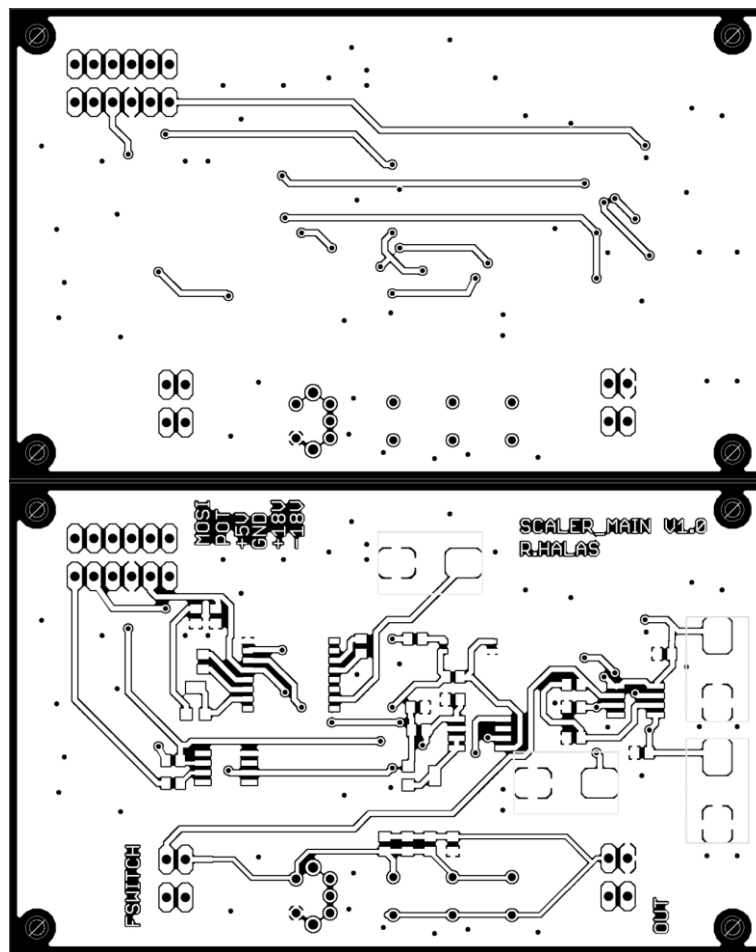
Generator printed circuit board a) bottom side b) top side
